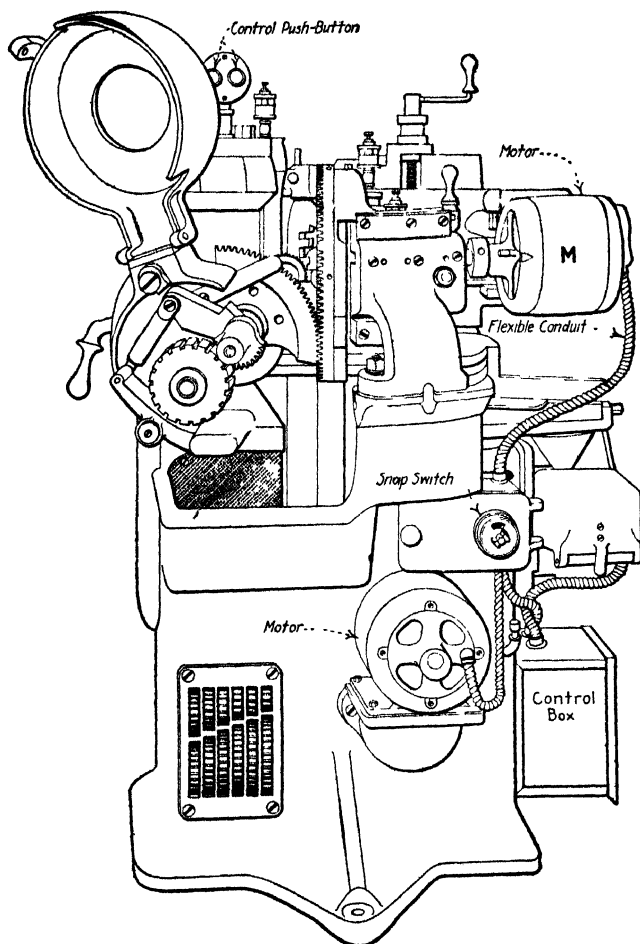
A modern 4-in. spiral bevel gear generator showing ideal electrical wiring.
